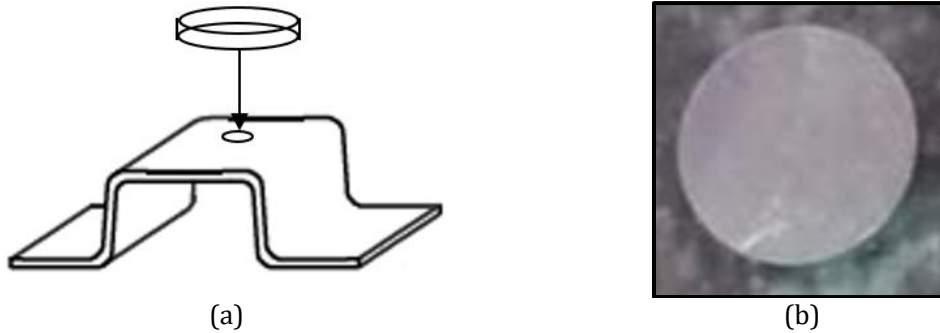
(a) Illustration of laser cutting 22MnB5 into RNGN 120300 insert (b) Sample product of 22MnB5 component being cut from hot stamped part (12 mm diameter, 3 mm thickness)
